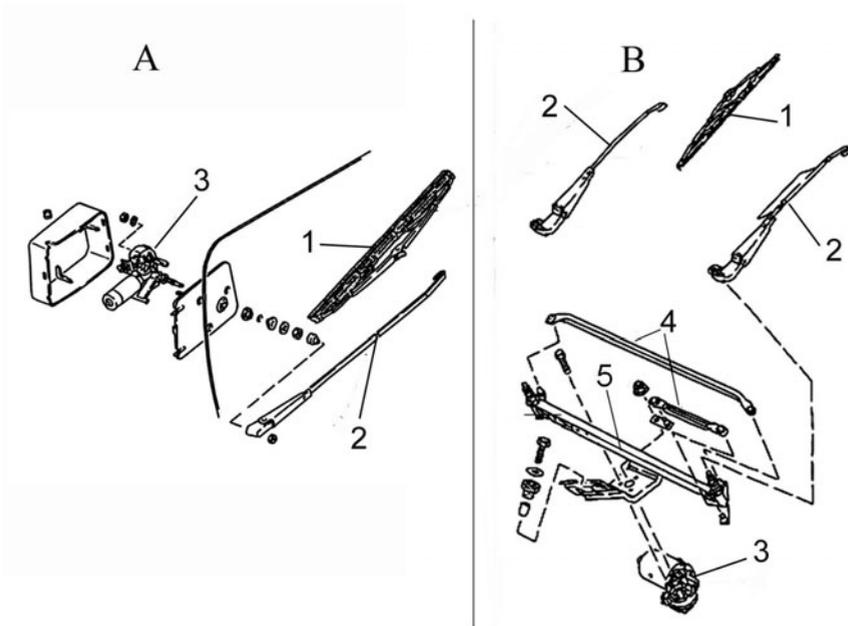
A: rear wiper parts; B: windshield wiper parts.
